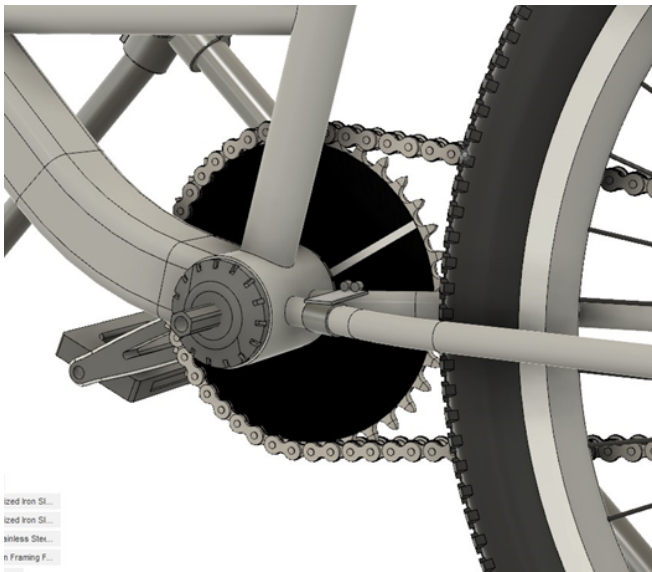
Prototype CAD Model of the Tachometer Mounting Setup
